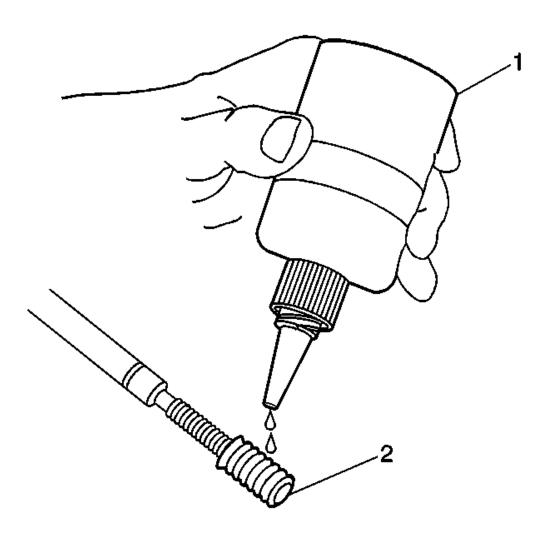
Applying Threadlock To Insert Courtesy of GENERAL MOTORS COMPANY
